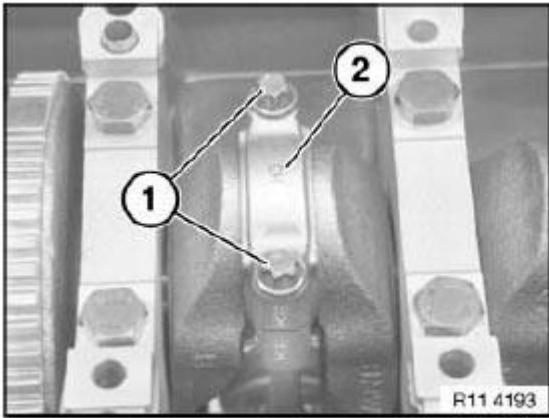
Identifying Conrod Bolts And Bearing Cap
